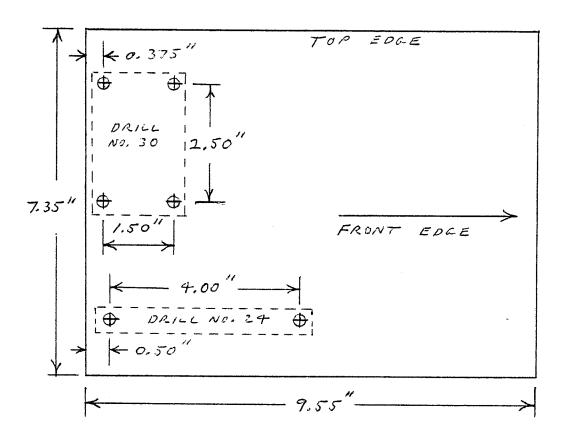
Synthesizer Distribution Module Board Dimensions
